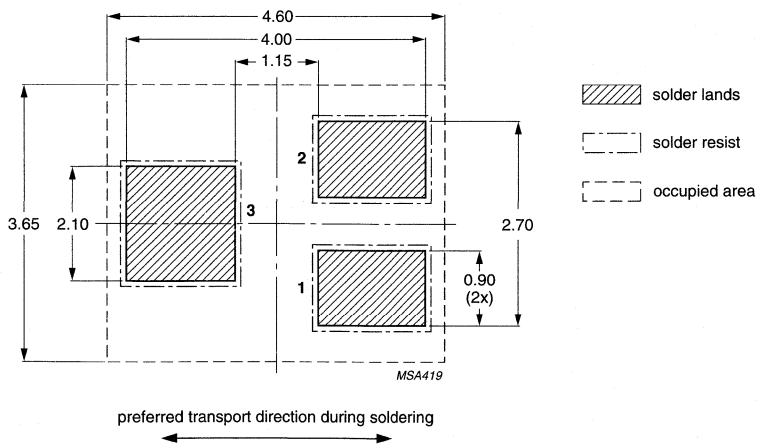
Wave soldering footprint for SOT323 and SC70-3.
